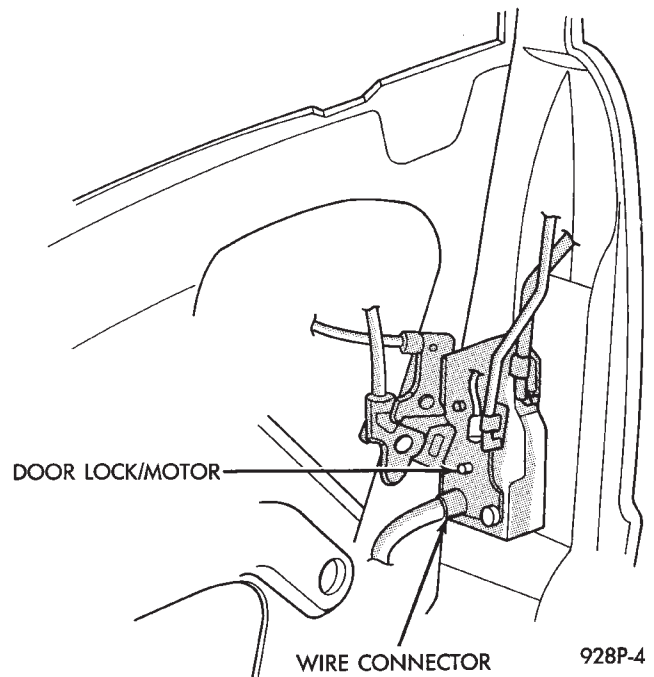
Front Power Door Lock Motors – AC and AY Bodies
